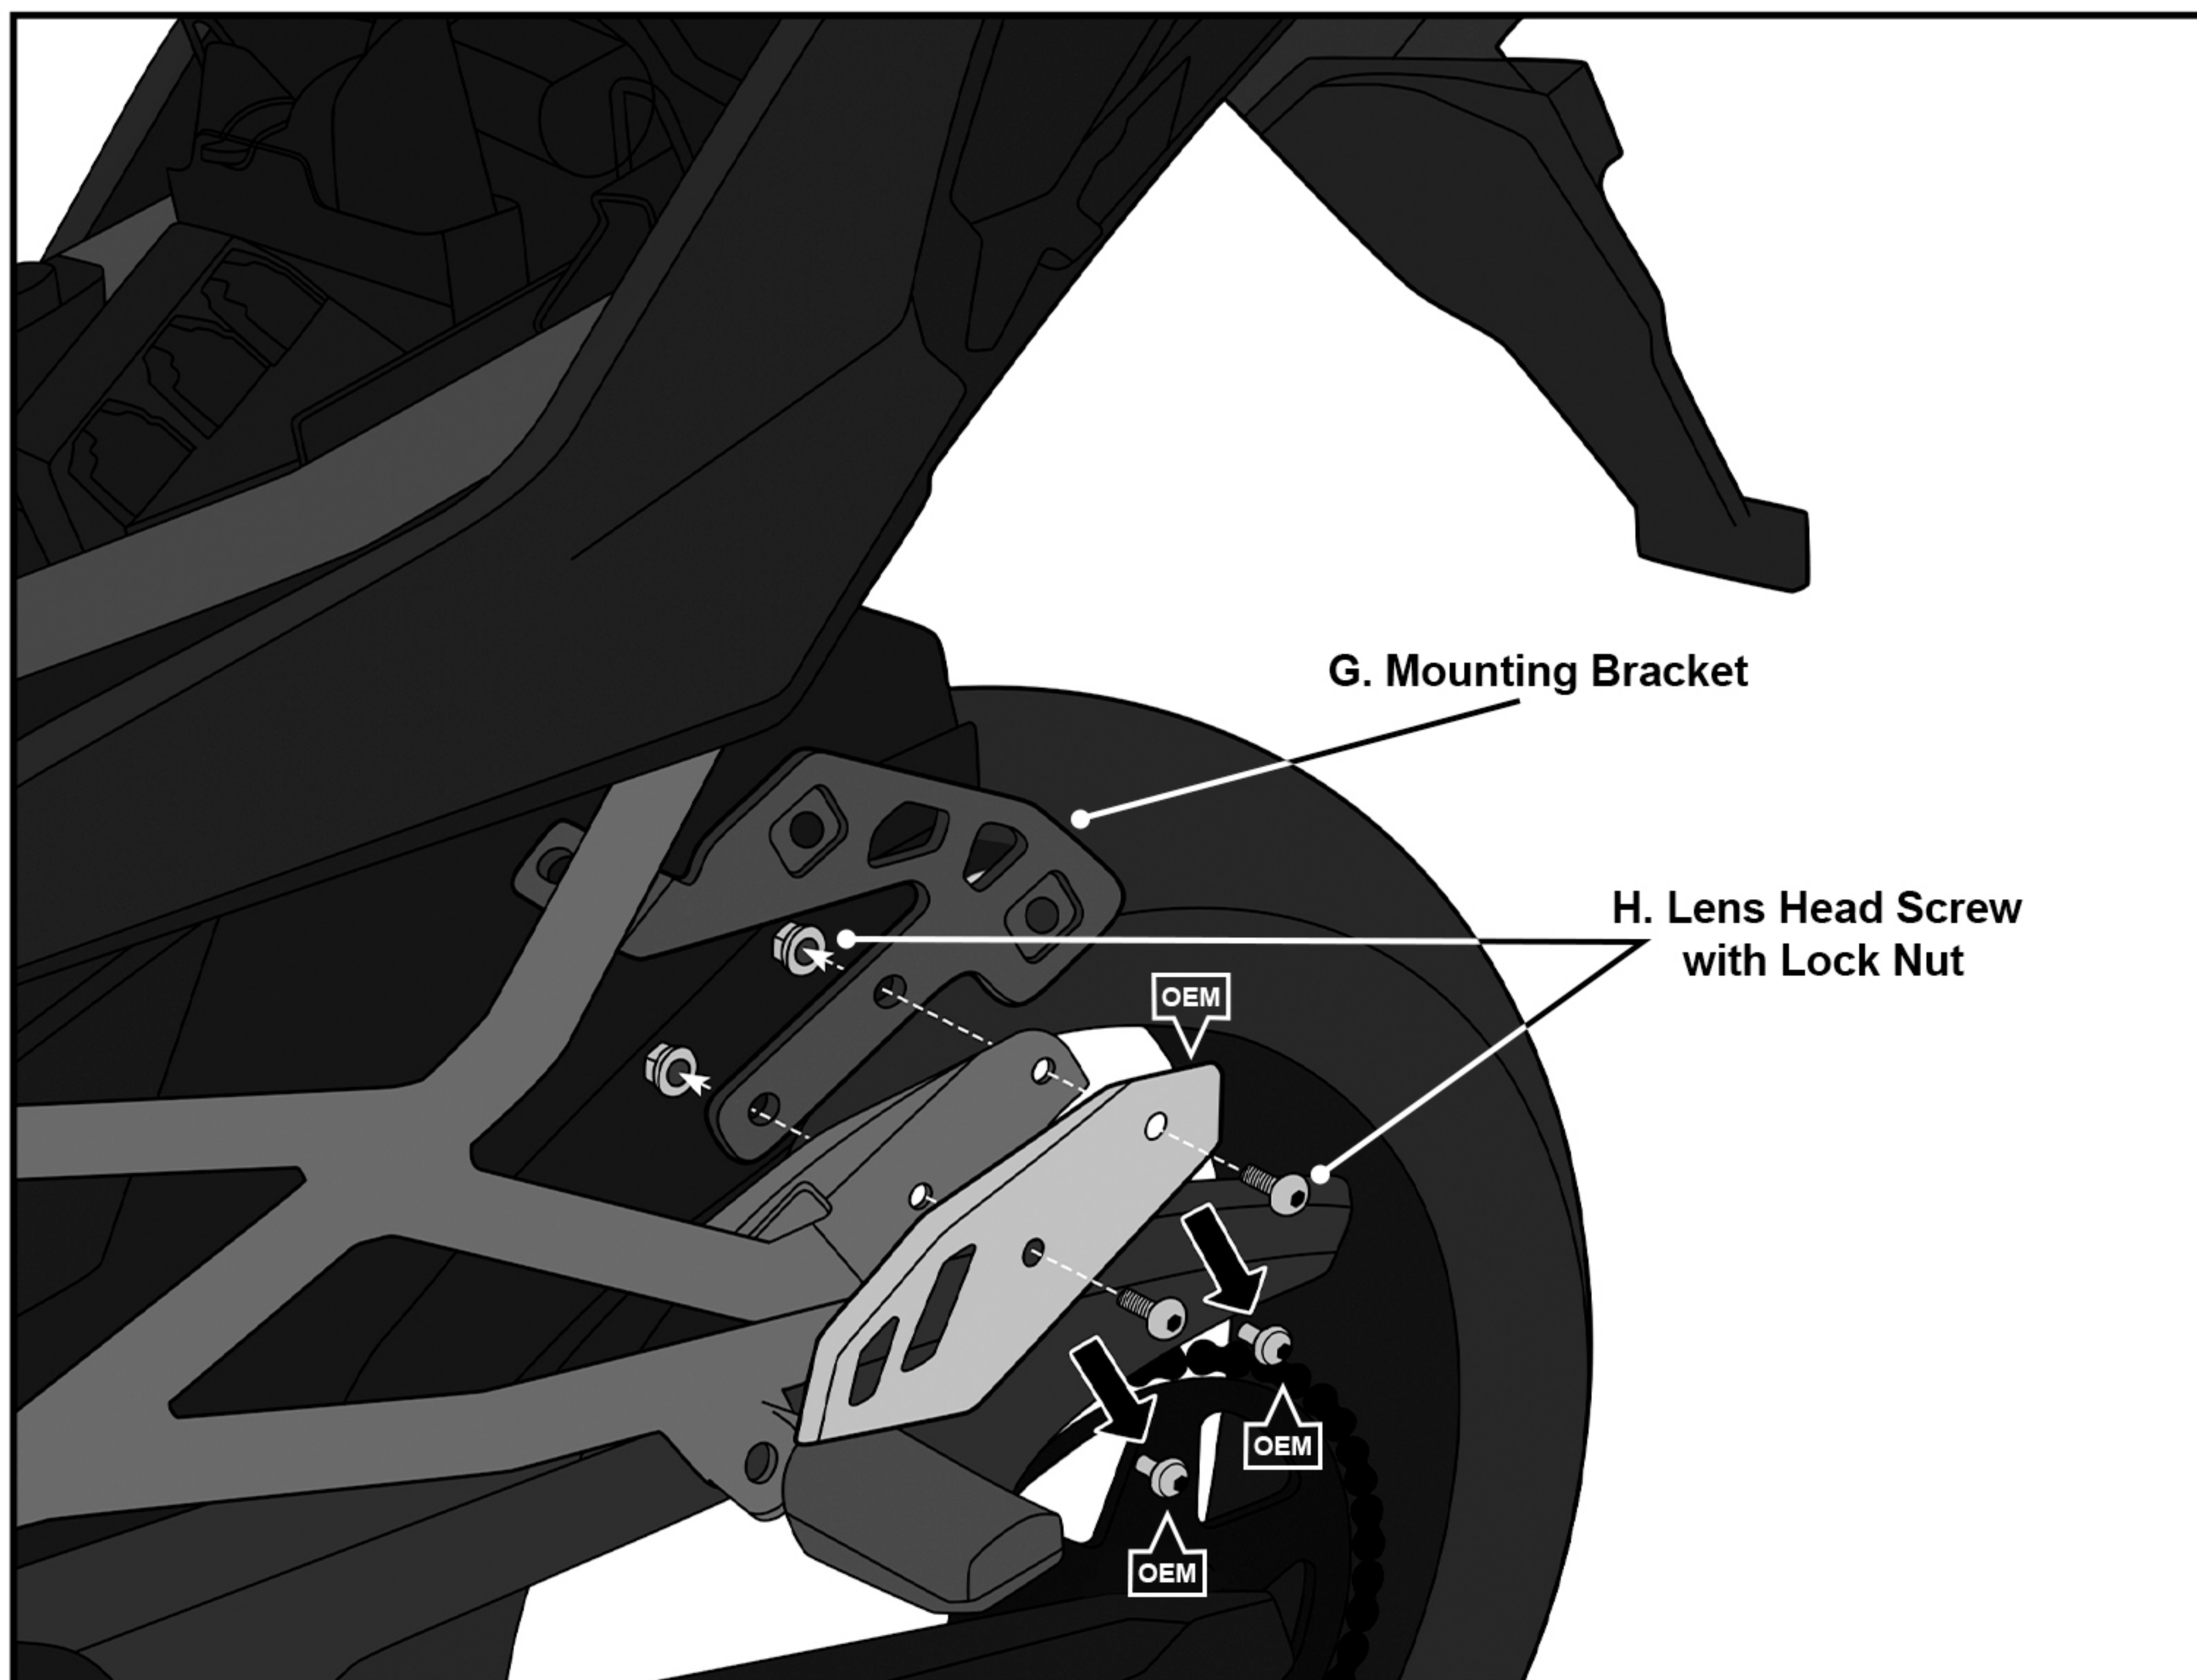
Reinstalling the mounting heel with flat mounting brackets
